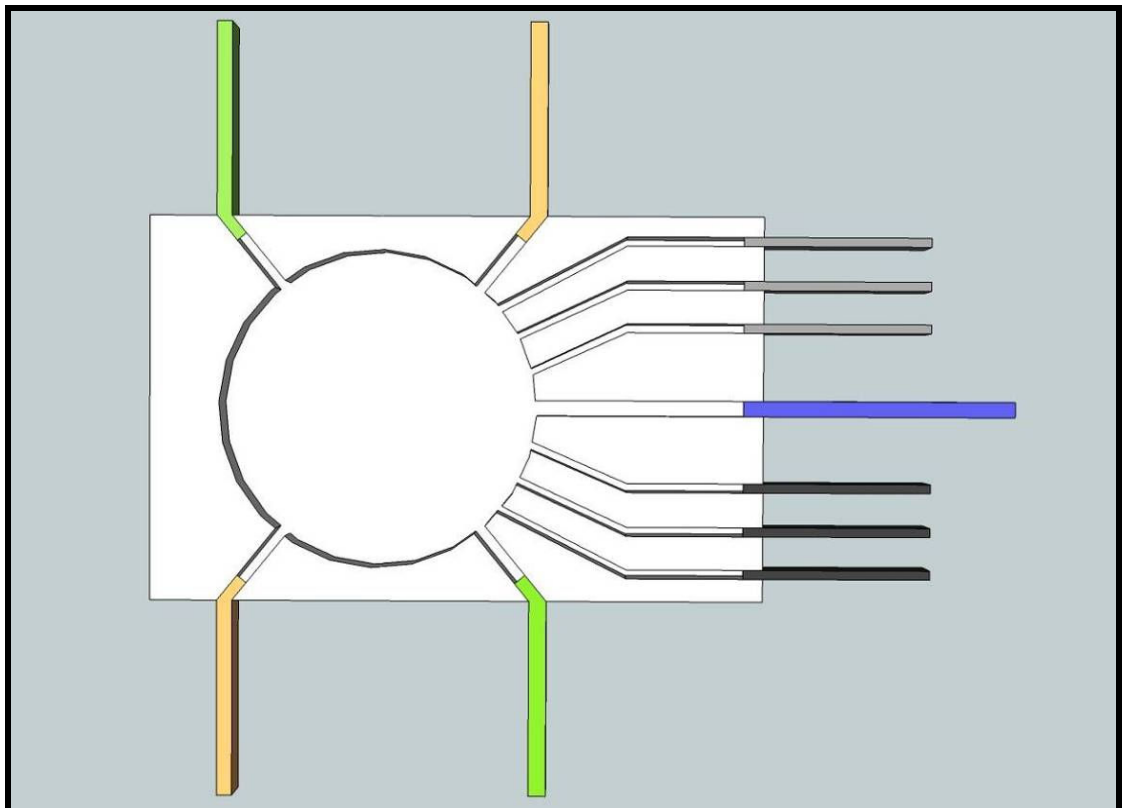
Design schematics showing the size measurements (values in Table 9) for the bottom half of component 3
